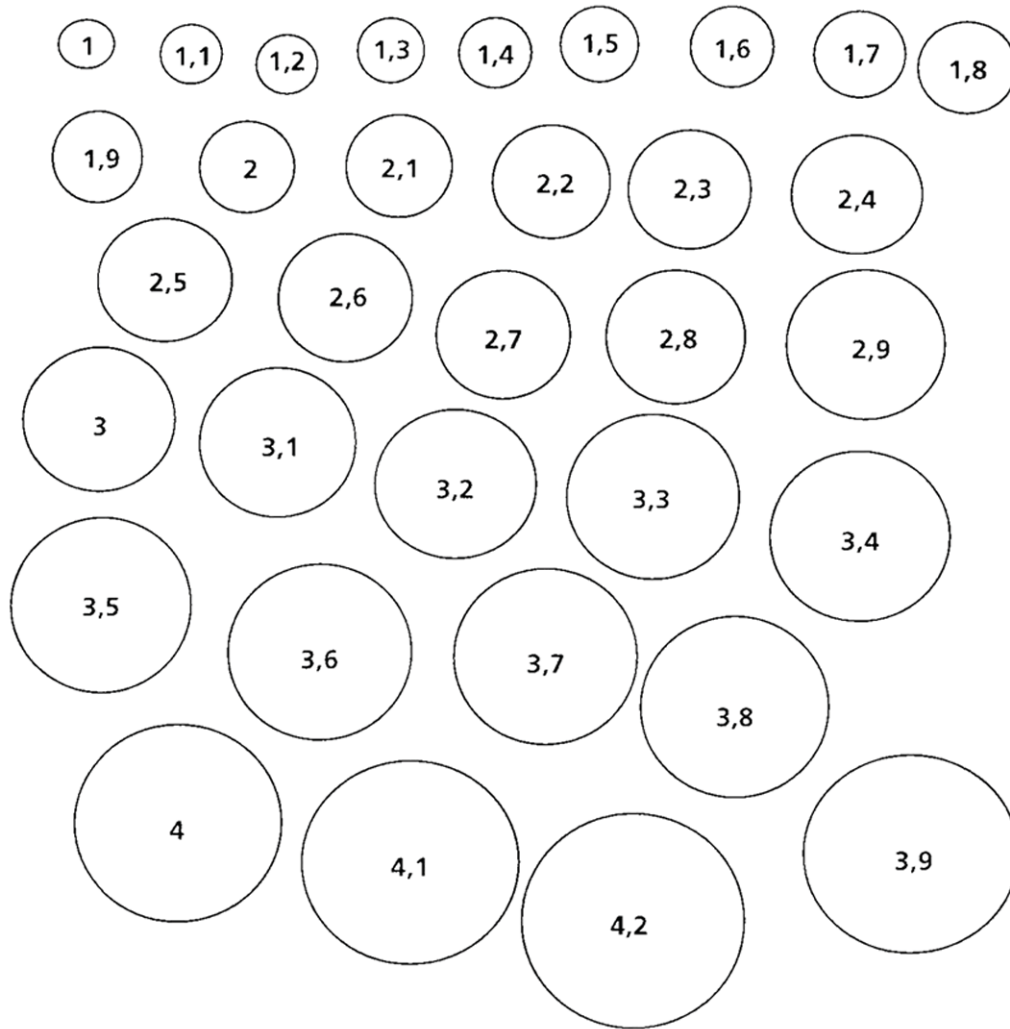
Sized circles for measuring weld toe radius (for illustration only, not to consistent scale)
